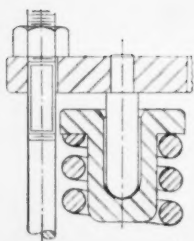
This cross-sectional sketch shows a socket cap for centering 2 1/2 heavy coils.
